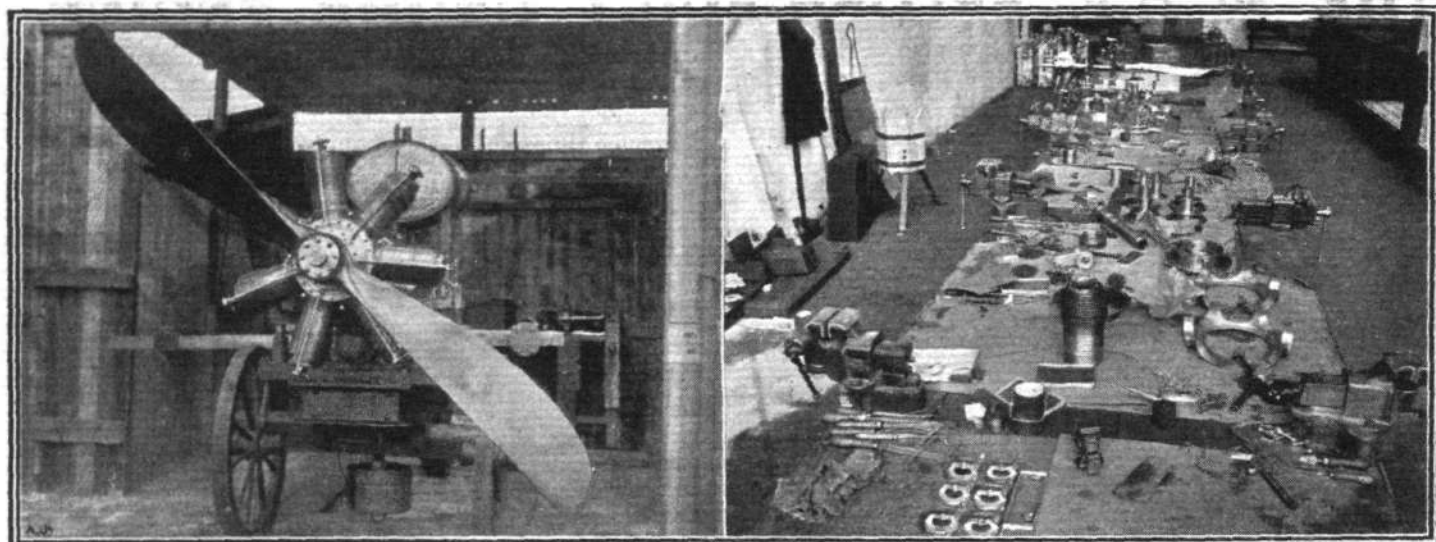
The 80 h.p. Daimler-Gnome Engine.—On the left an engine is seen mounted on the testing bed, whilst on the right is a view of an erecting bench showing the engine parts laid out ready for assembling.
